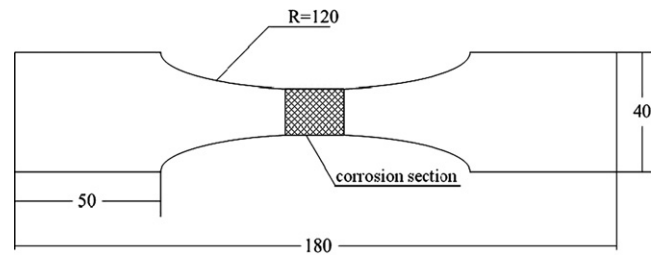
A schematic showing shape and dimensions of the specimen used for testing (thickness = 3 mm).
